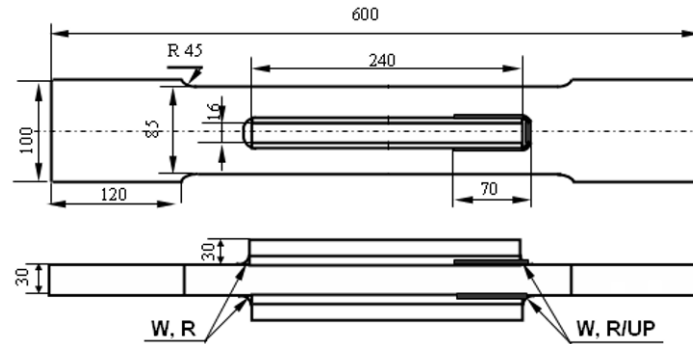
Drawings of welded specimens for fatigue testing at different conditions:
